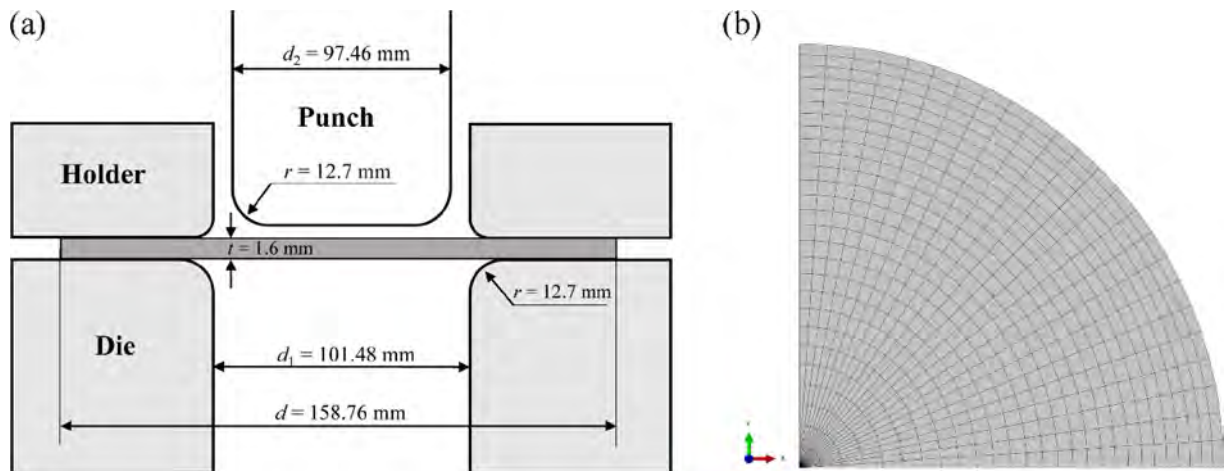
Set-up of the cylindrical cup drawing model (a) Geometrical setting (b) mesh of the blank.
